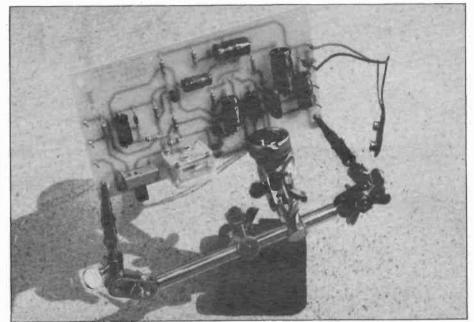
The prototype TRF receiver under construction. A jig of this type greatly helps in handling PCBs.
